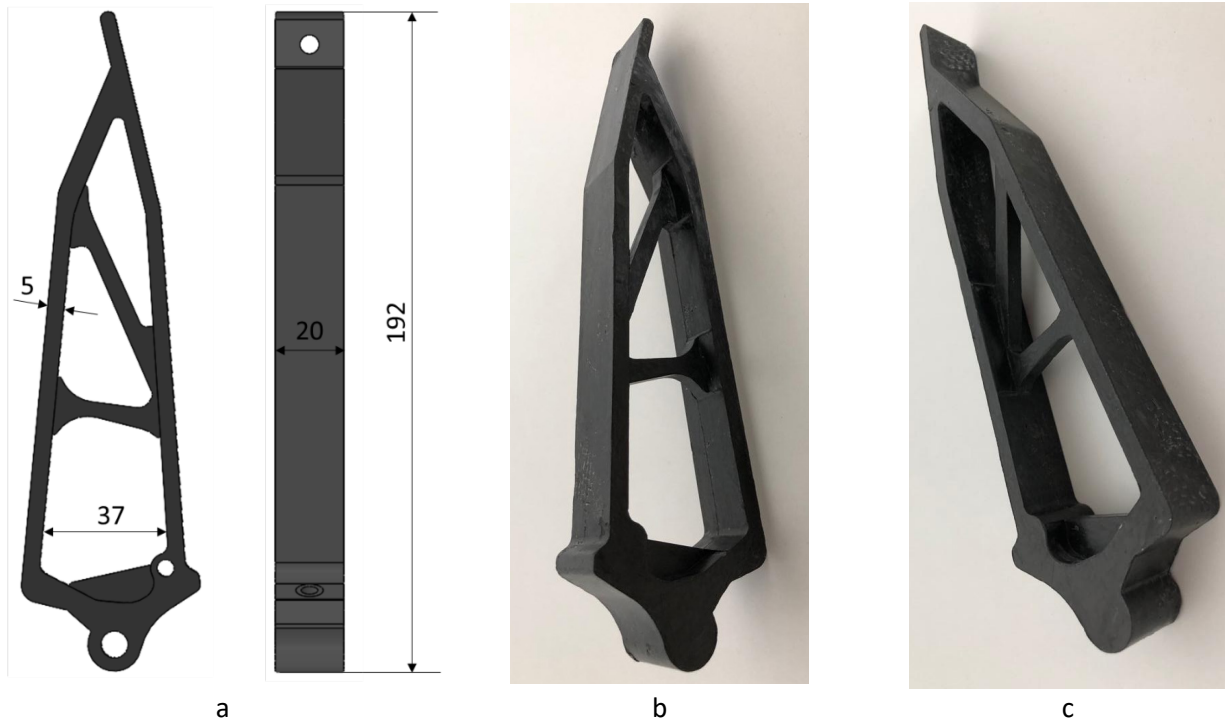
Prototype of an accelerator pedal frame produced with the PPMC technology: a) CAD model with basic dimensions expressed in mm; b-c) produced component
